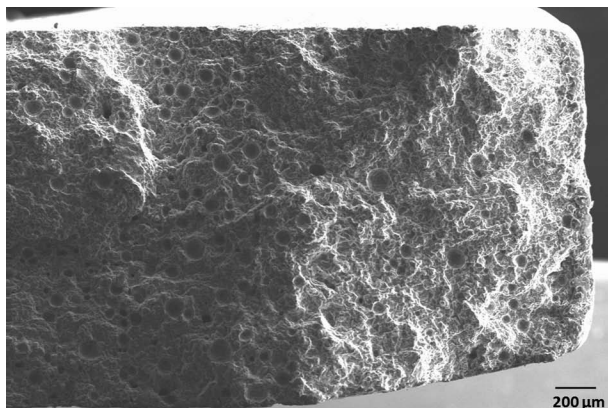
Higher magnified image of the fracture surface shown in Fig. 143. Note the presence of porosities throughout
